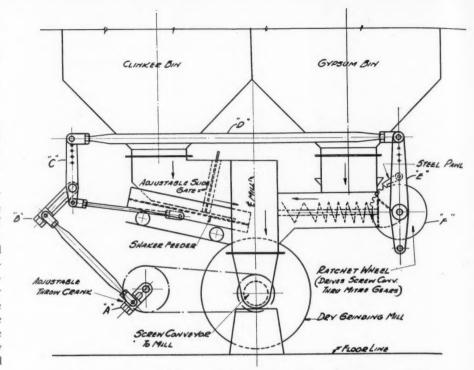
A screw feeder used in connection with a shaking pan feeder
